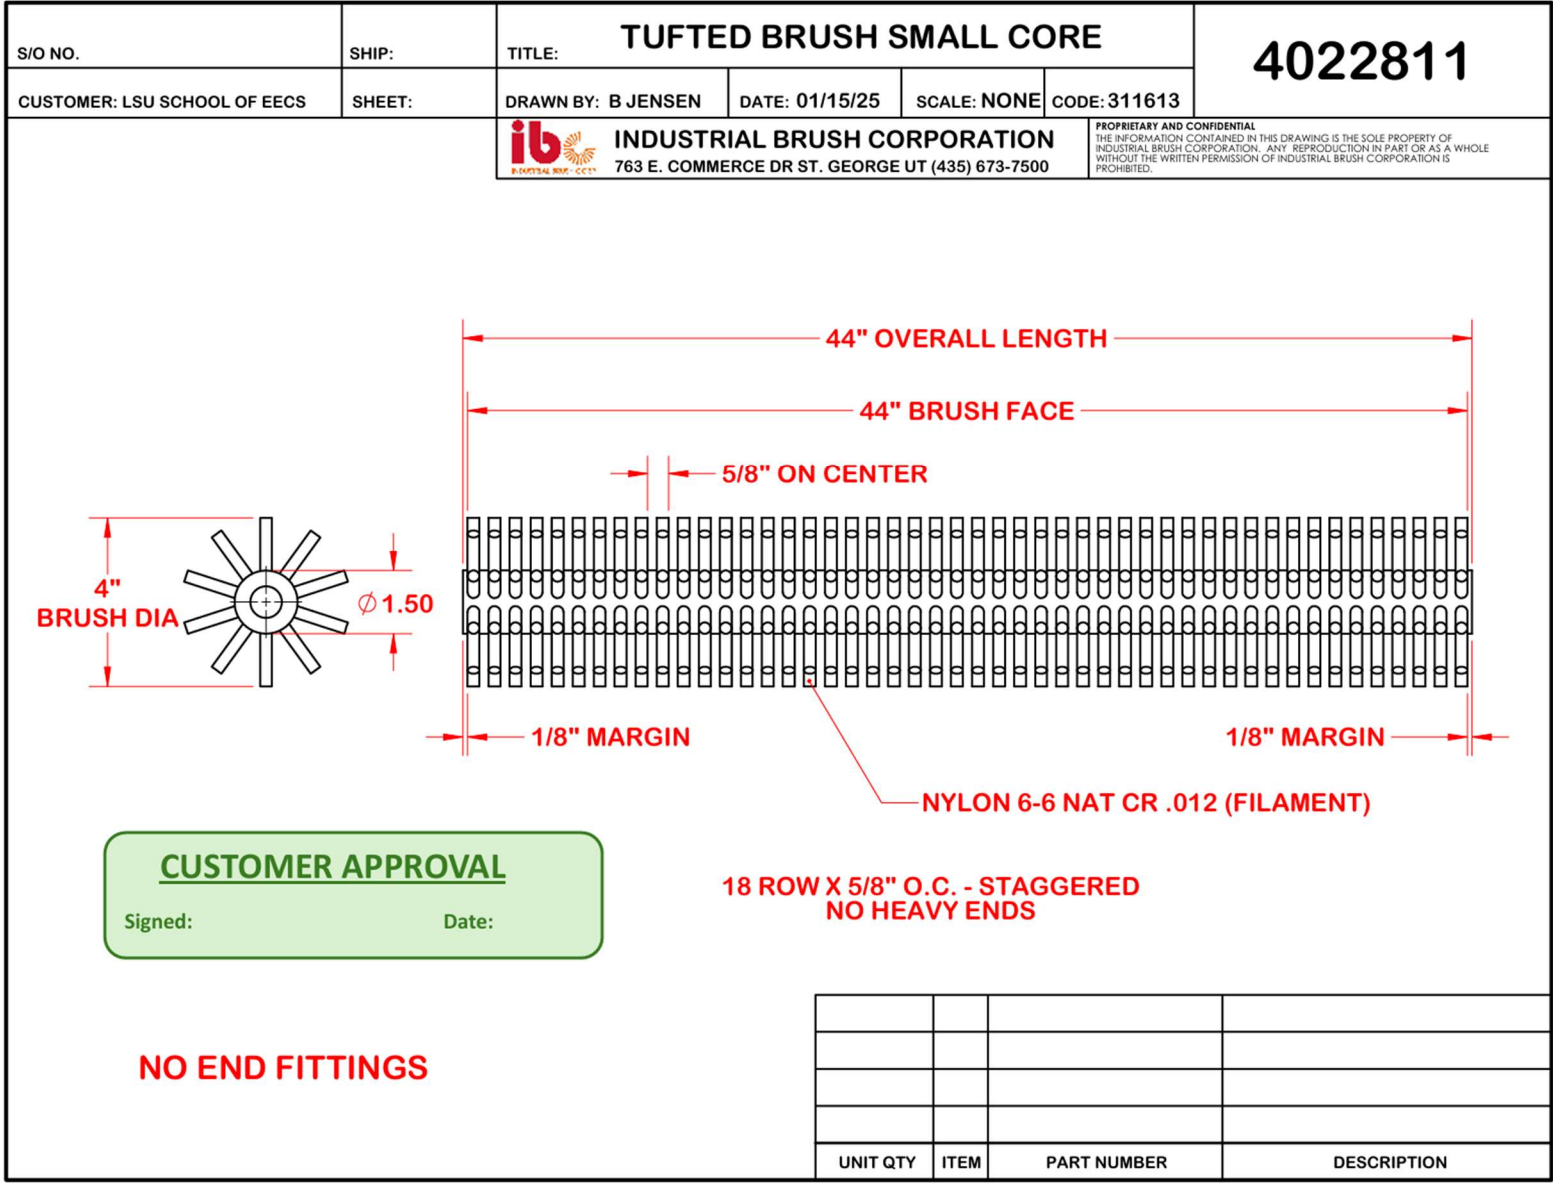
Manufacturing Drawing of part SS#2-P#10- Solar Panel Safe Radial Brush
